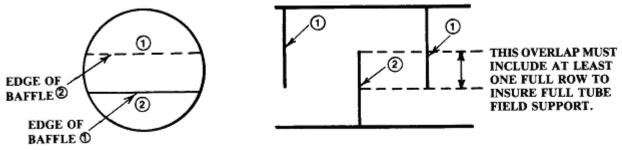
Sketch of Typical Segmental Baffle Arrangements.
